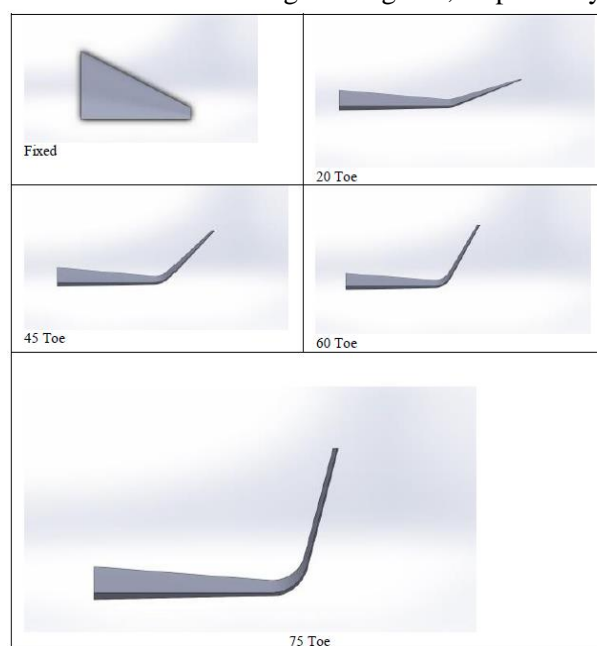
CAD drawings of morphing winglet at 0-20-45-60-75 Toe Angles
